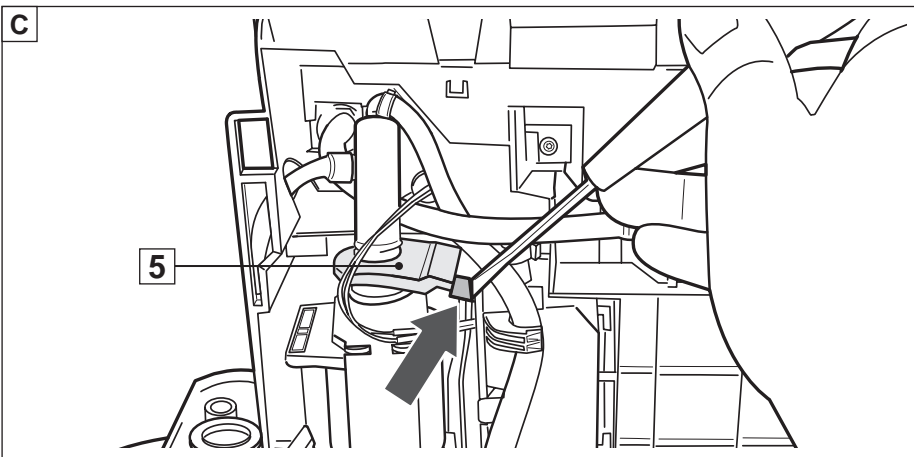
Figure C: Using a phillip's screwdriver on the indicated tooth, extract the upper support (5) and slightly extract the pump.
